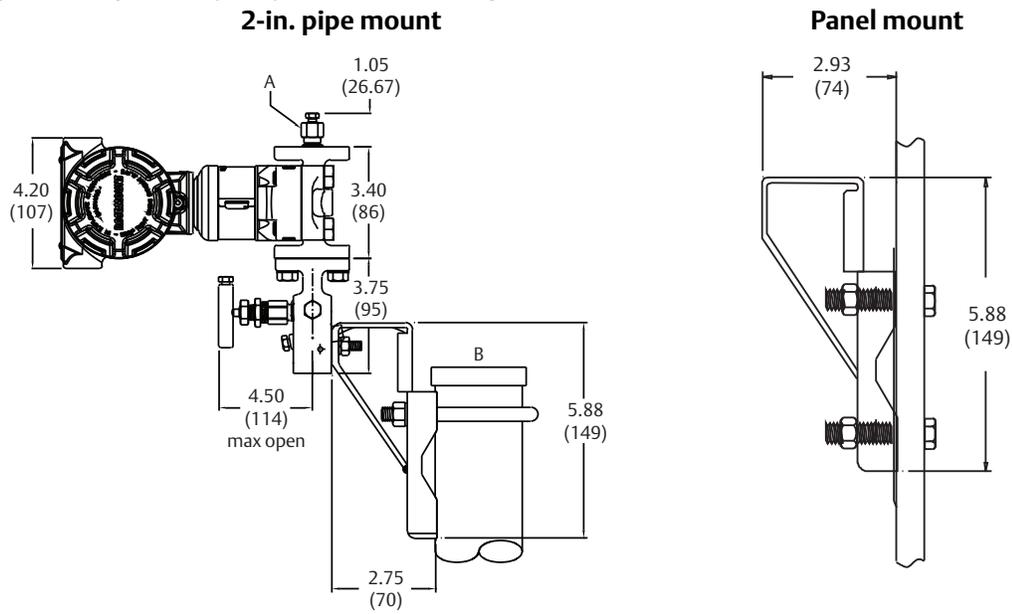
Coplanar Manifold with Optional Bracket for 2-in. Pipe Mounting⁽¹⁾
